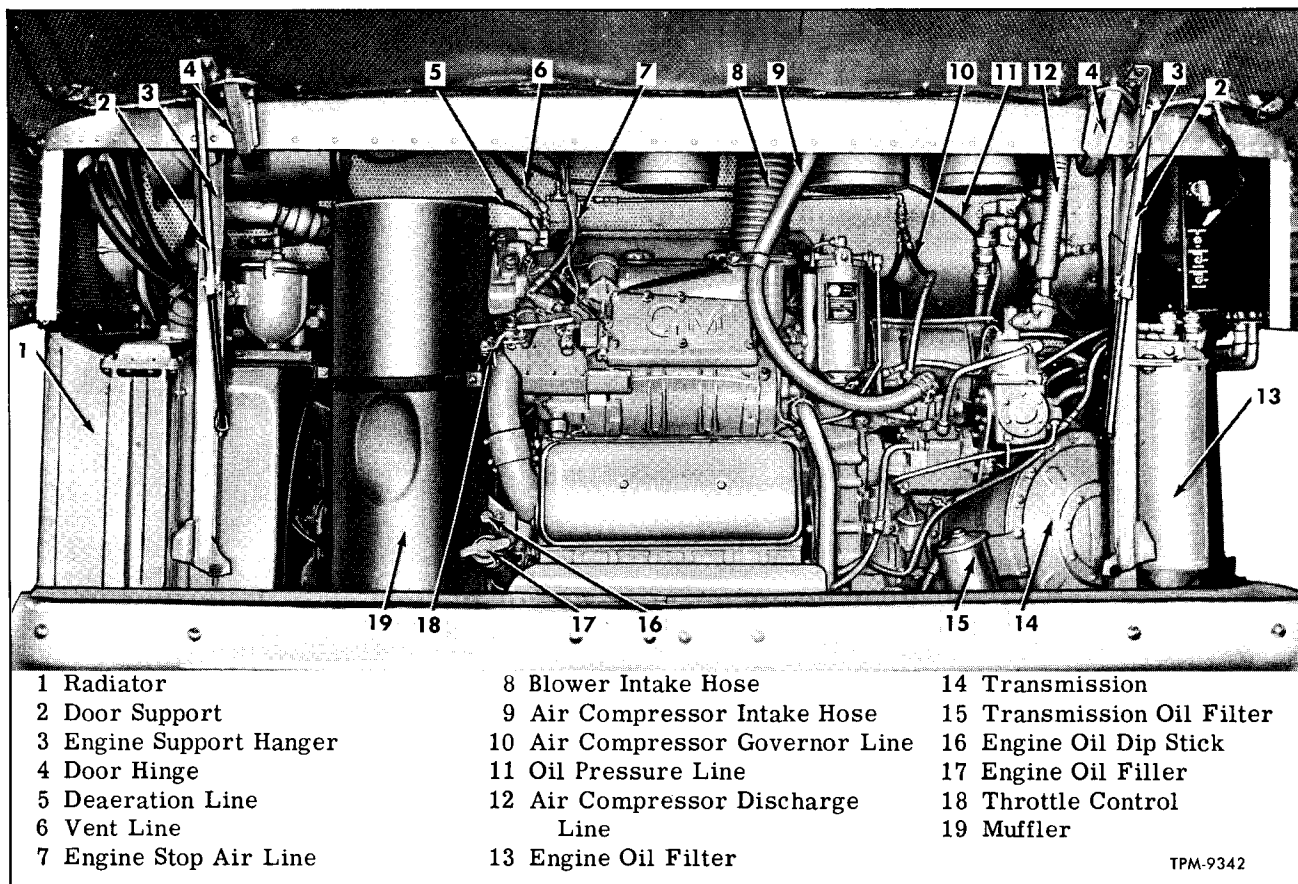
Power Plant Assembly Installed—6 Cylinder with Hydraulic Transmission
